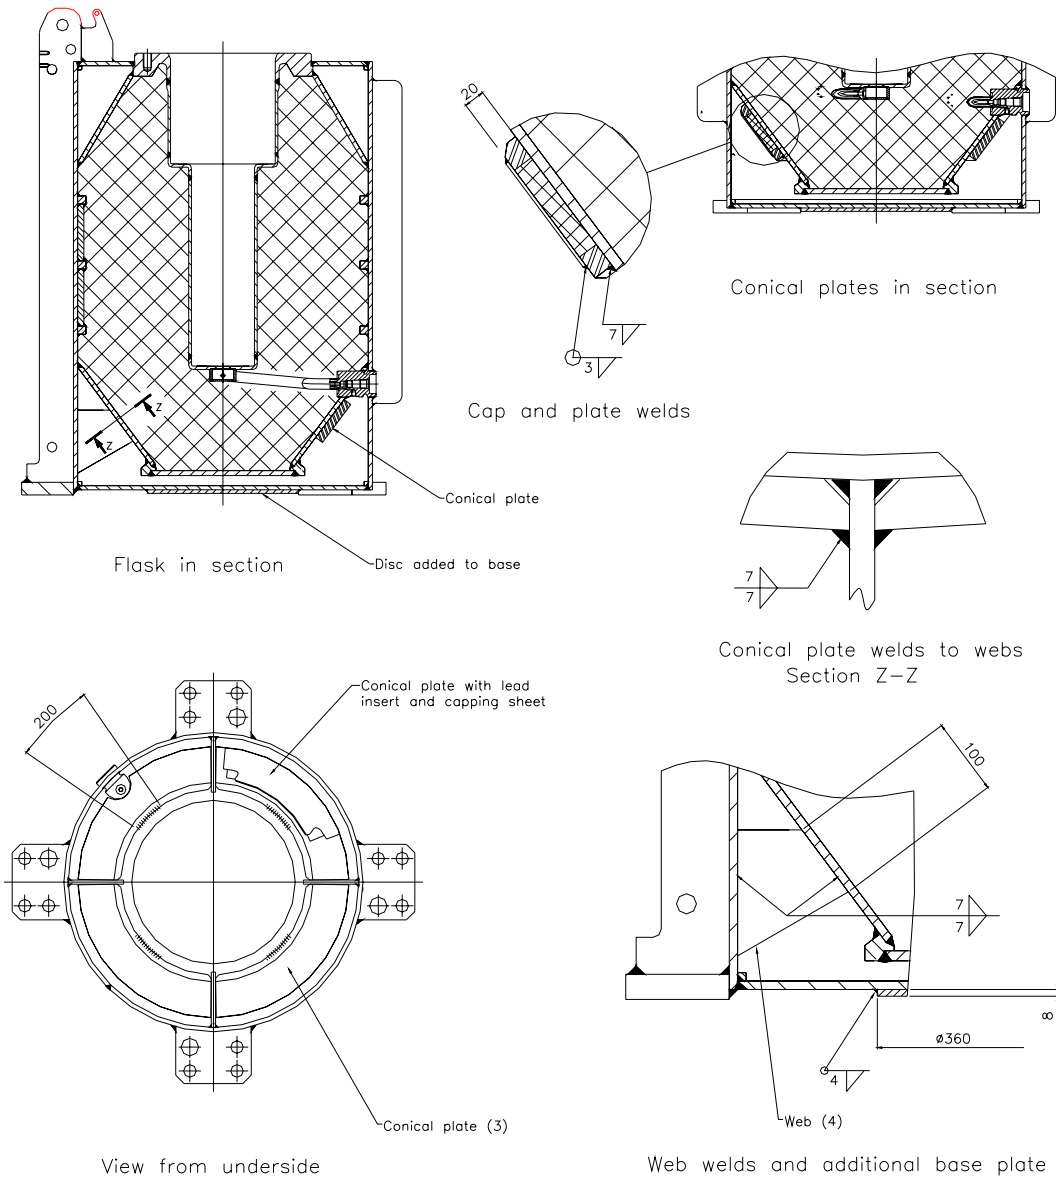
R7021 Flask Modifications (from drawing R7021/002 issue E)
